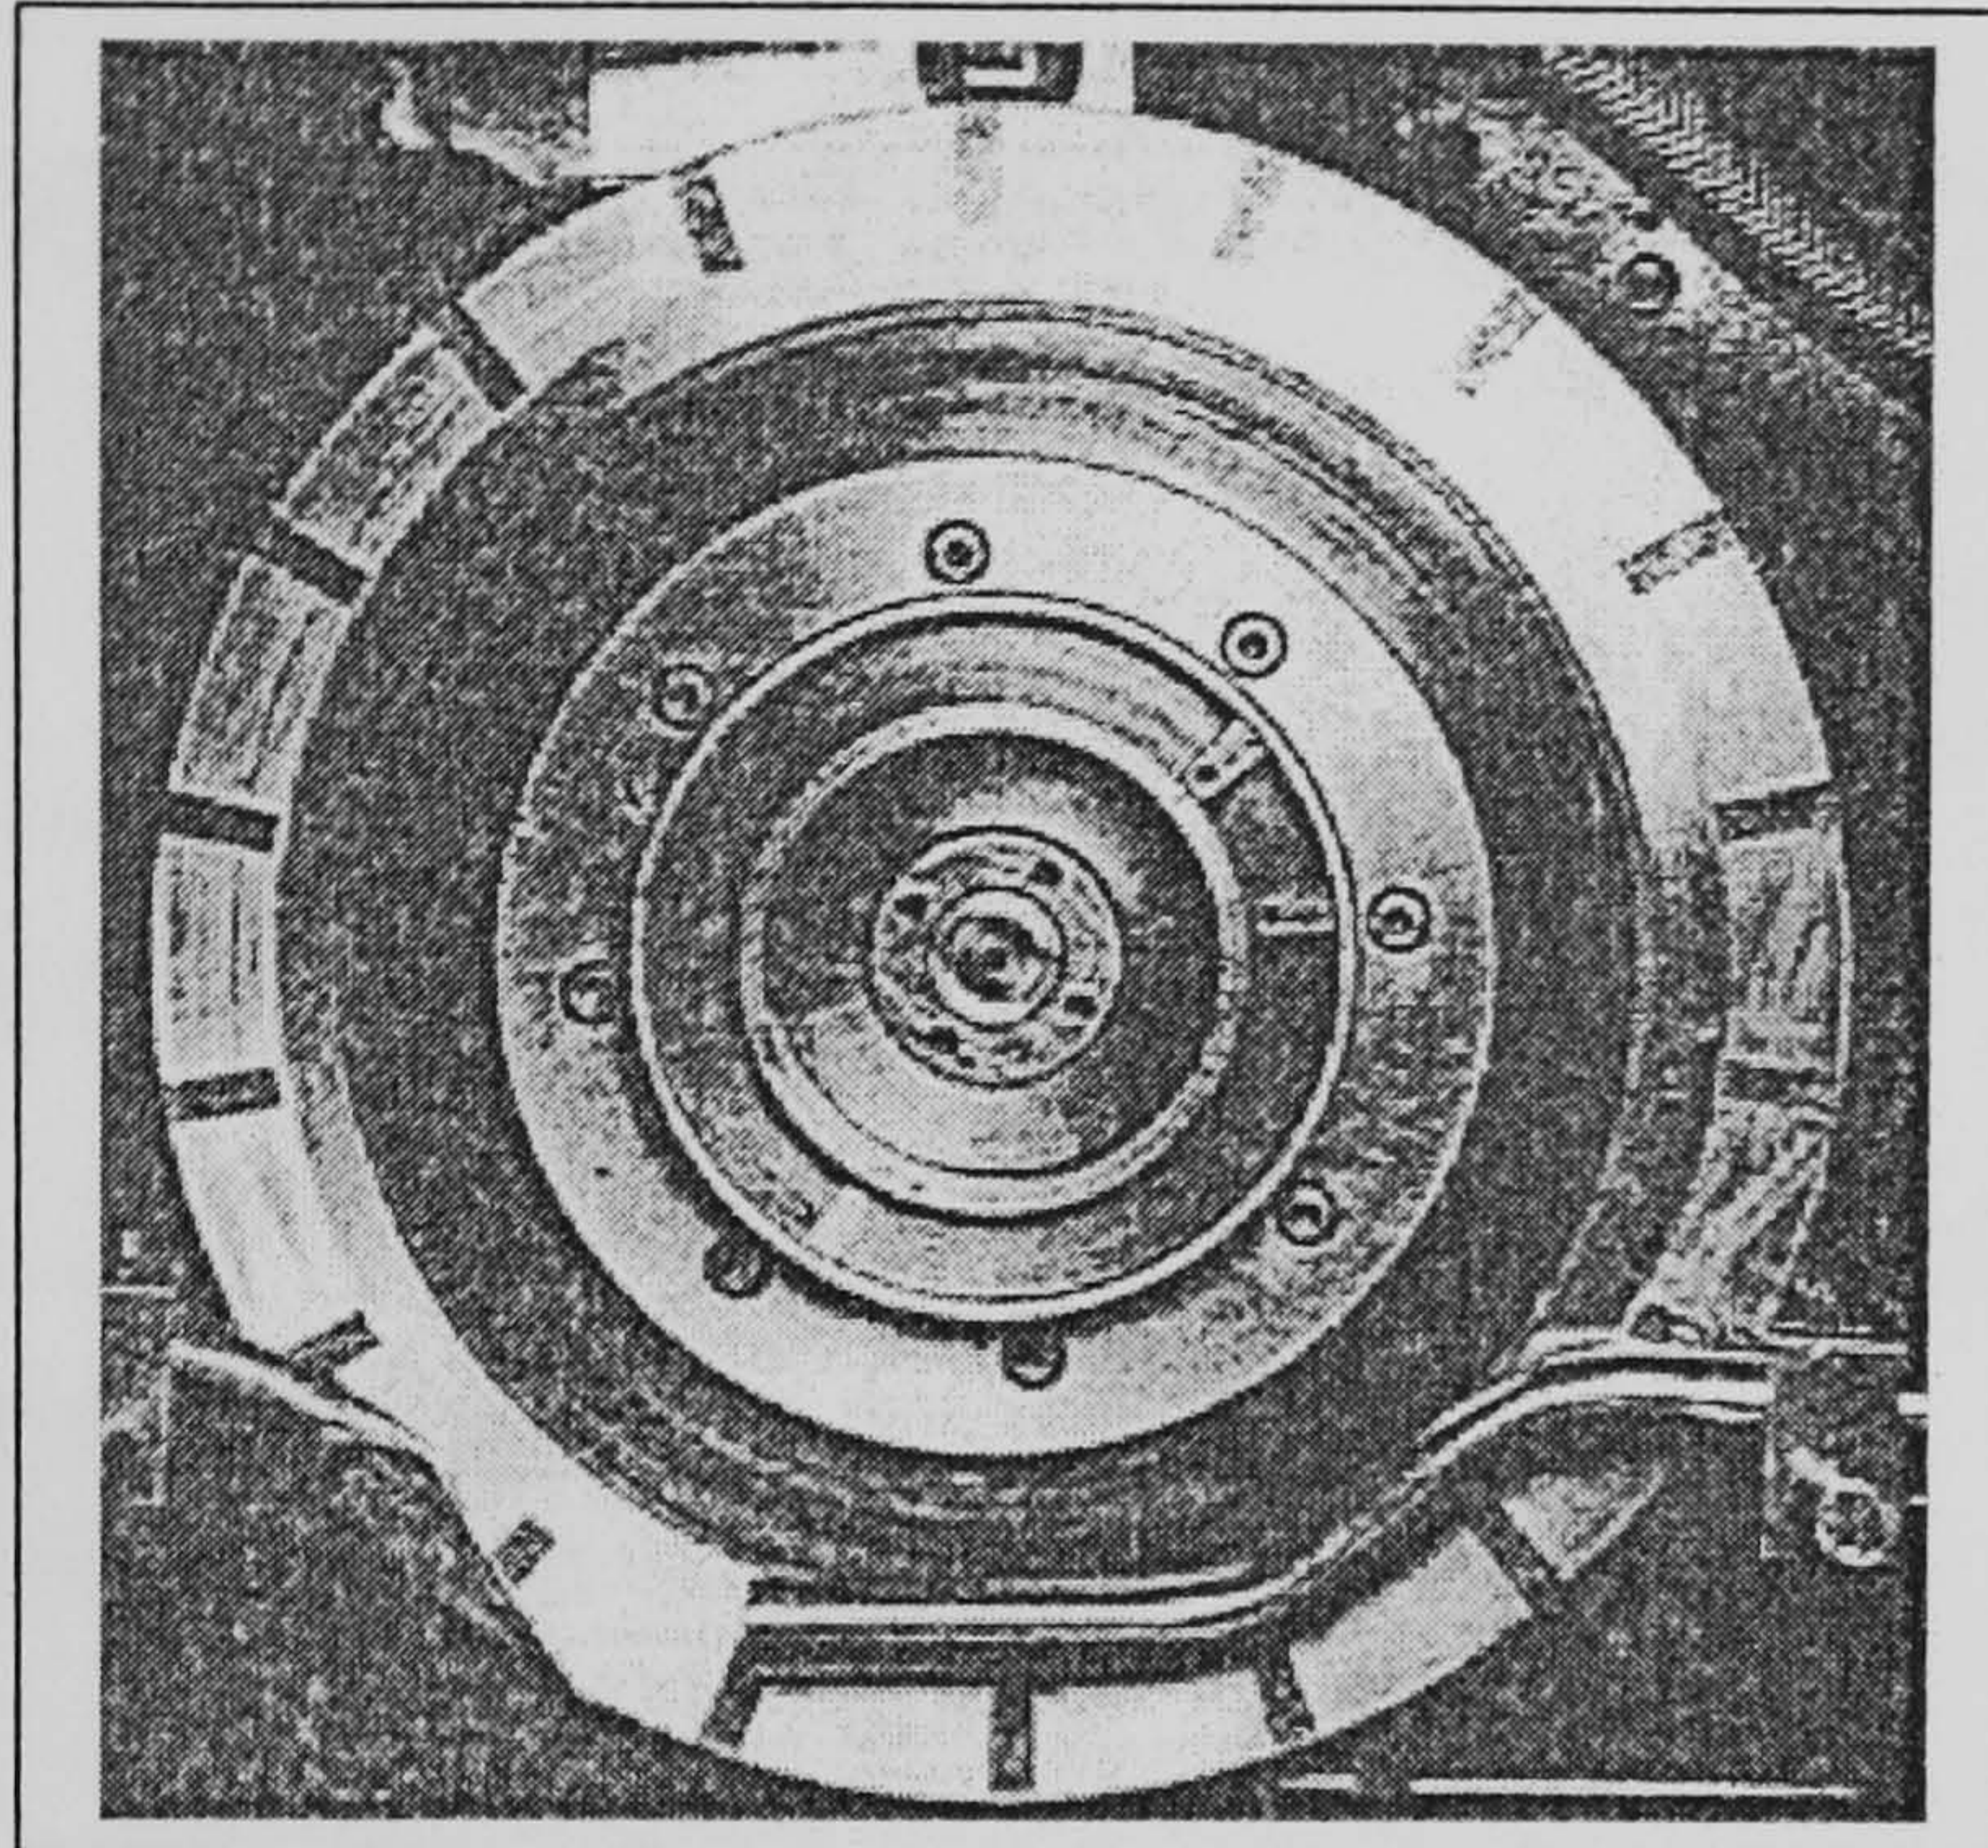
Werner & Tawakoli's Optimum Wheel Design
